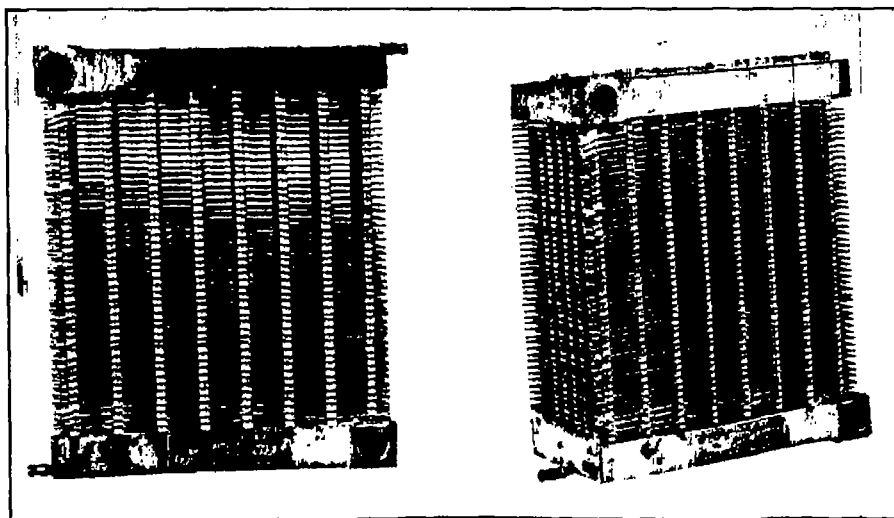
The McCord Manufacturing Co. Fin and tube. Core $3\frac{1}{2}$ inches deep.
